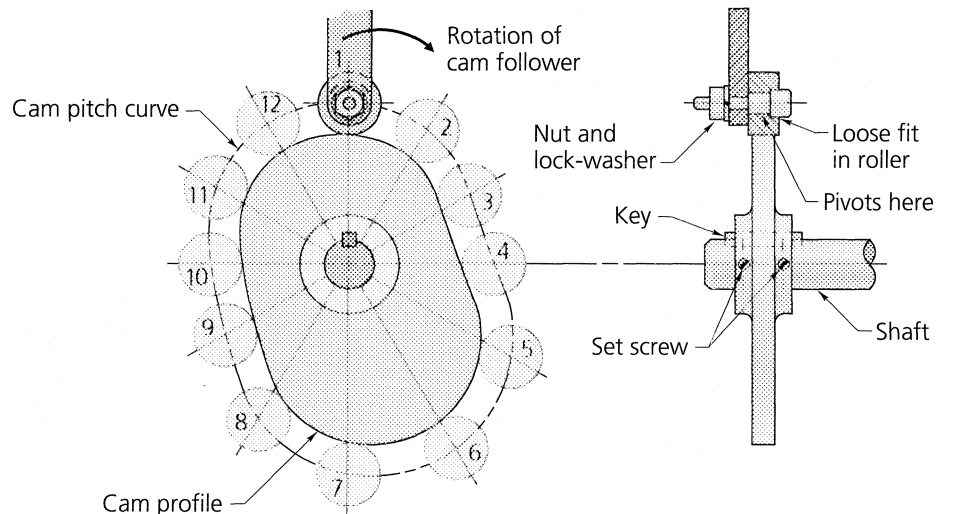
Cam-and-Roller-Follower Assembly
